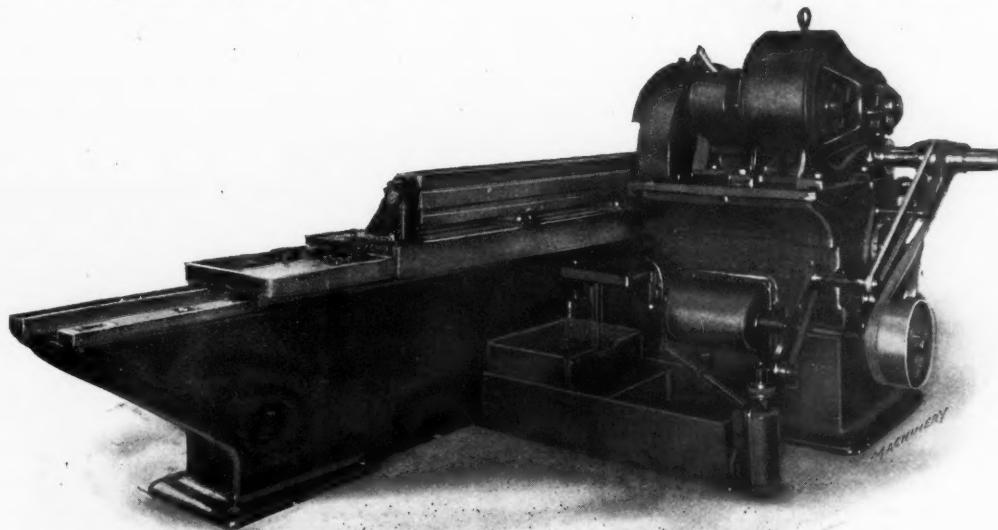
Rear View of Diamond Grinder showing Arrangement of Settling Tank and Pump
